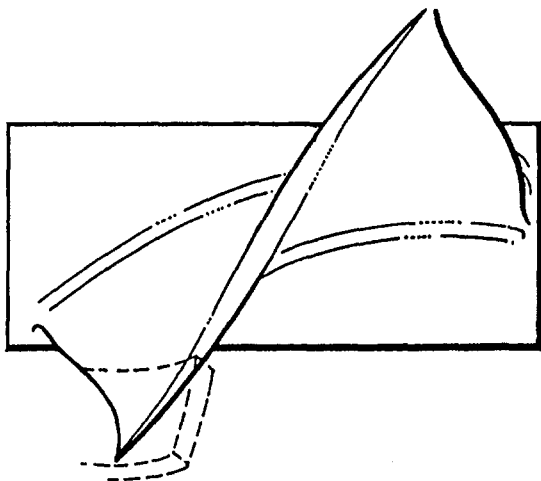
Restore leading edge profile, CNC machine, and blend to existing profile
